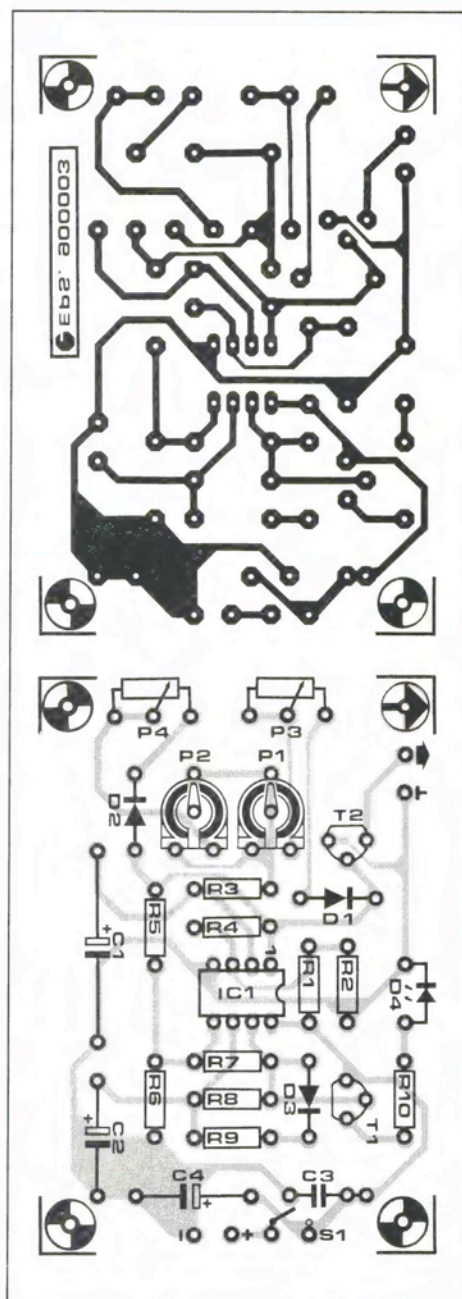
Single-sided printed circuit board for the interval control. The time controls, P3 and P4, may be soldered direct to the board.
